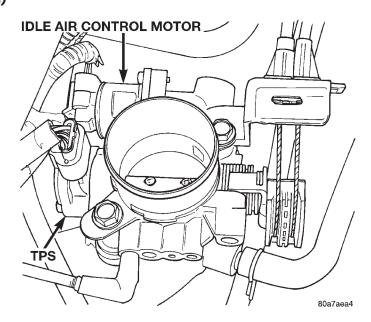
Throttle Position Sensor and Idle Air Control Motor—2.4L
